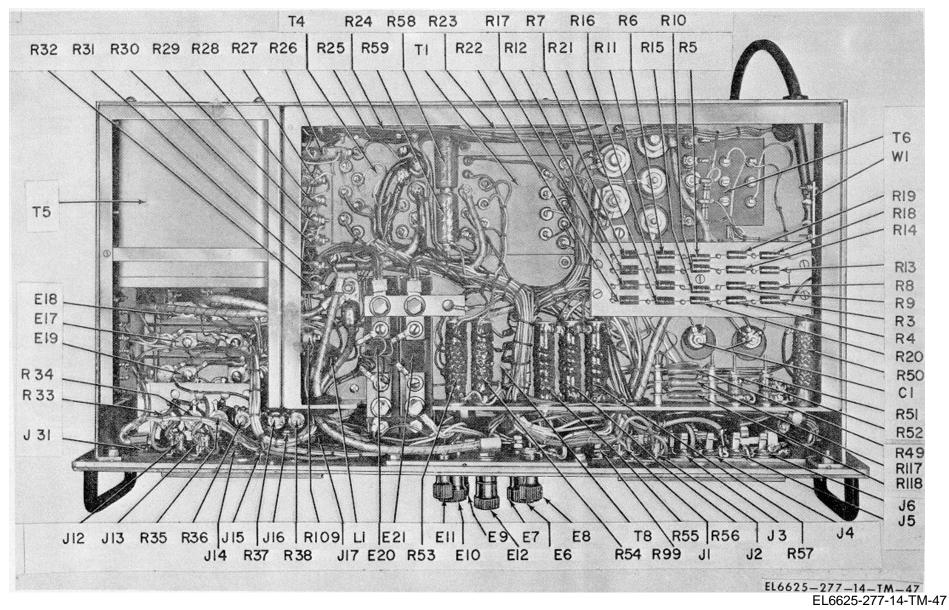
Meter Test Set TS-682/GSM-1, bottom view, case removed.
